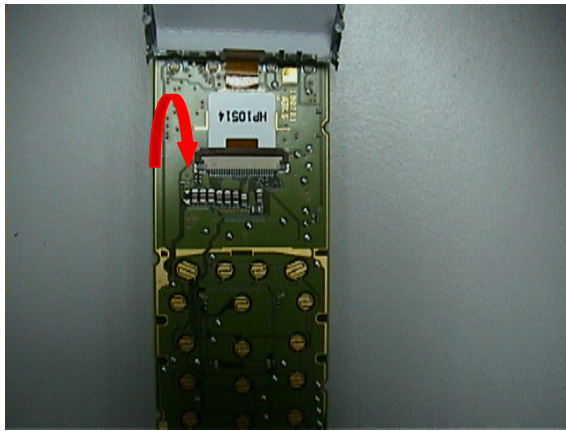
DISASSEMBLE A50— STEP 6
